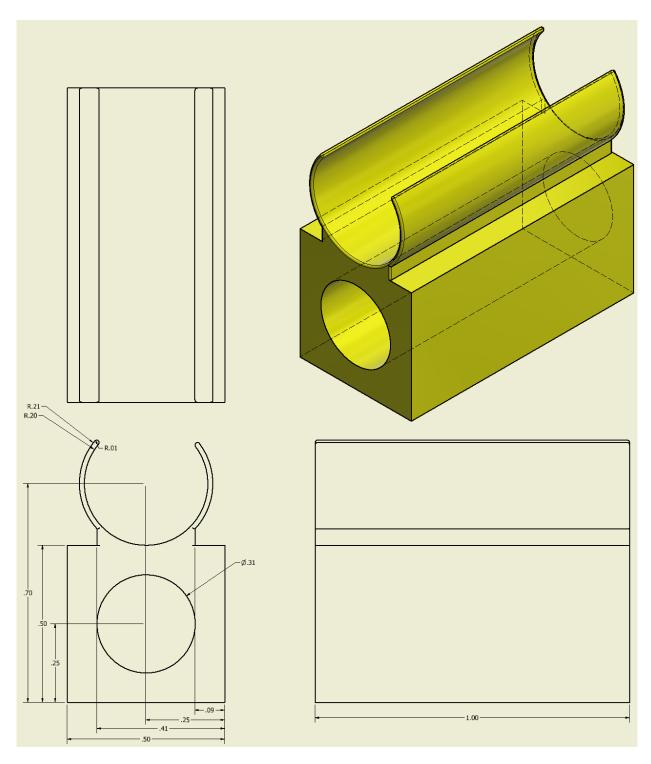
Pen Holder Clip Mechanical Drawing (Units: in)
